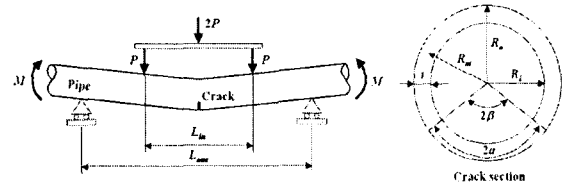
Circumferential through-wall cracked pipes under pure bending
